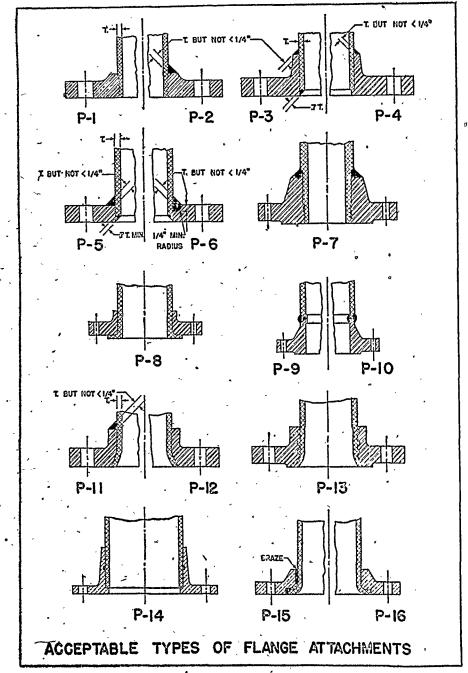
Flanges with screwed threads may be used for Class I piping not exceeding 2 inches nominal pips size. For Class II piping, flanges with screwed threads may be used without diameter limitation.
